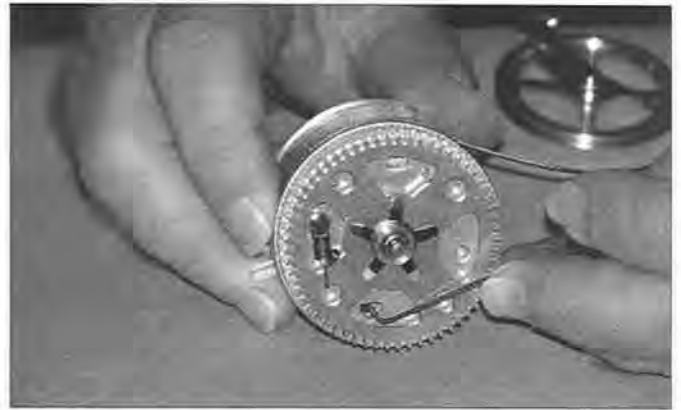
Click being released on time drum using "L" shaped probe to access inner gear.
